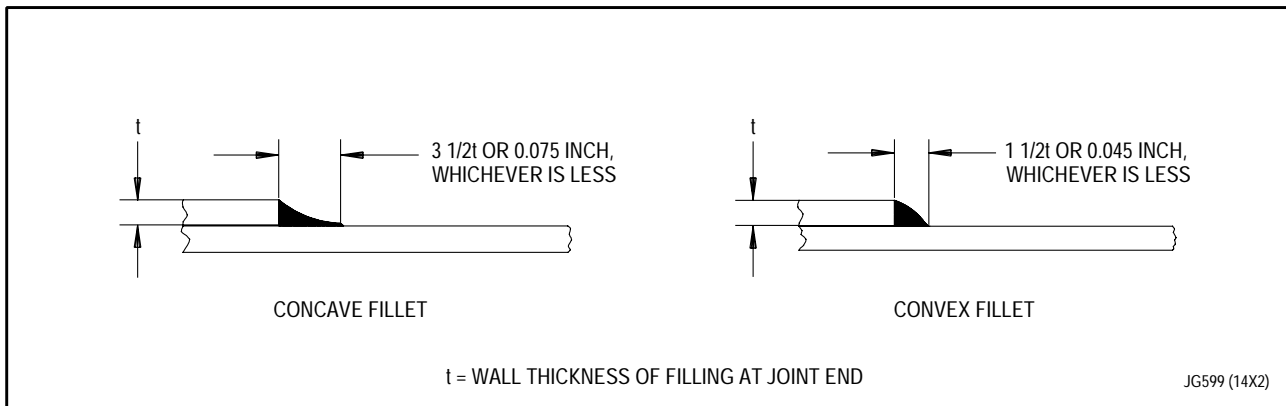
Acceptable Braze Fillets on Tube Assemblies
